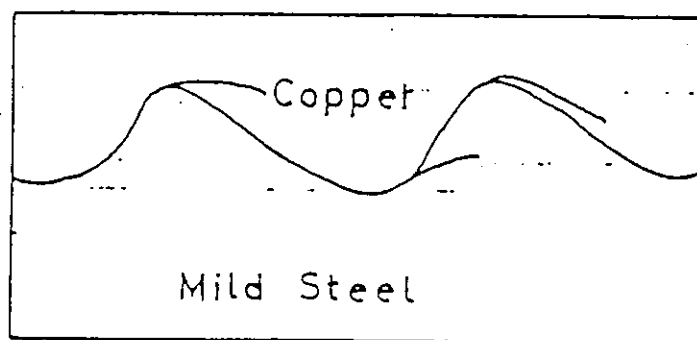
Interface of copper explosively welded to mildsteel
